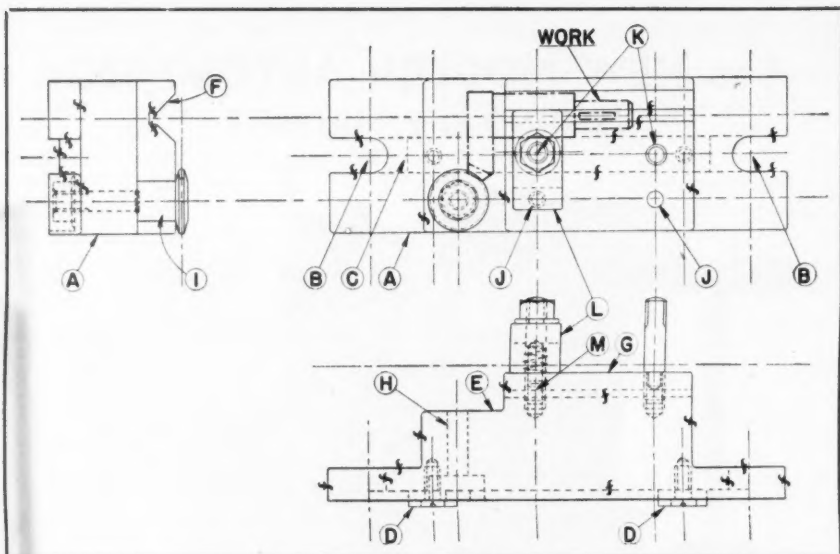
This illustration shows the fixture designed to be used for milling the Woodruff keyway in the part shown in Fig. 1.
